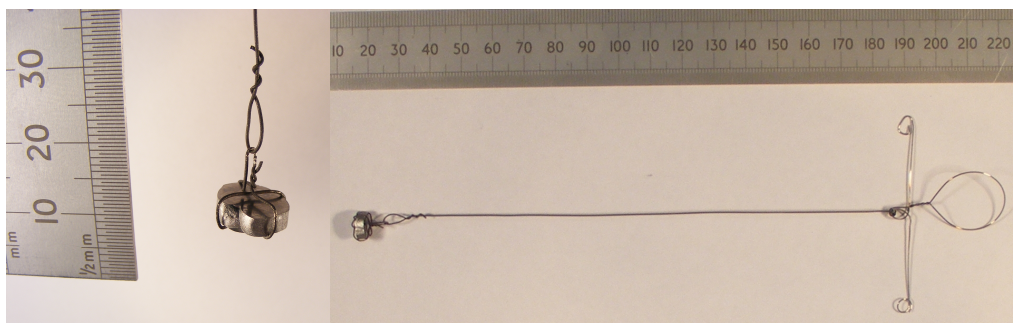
The nichrome wire cradle shown containing a specimen ready for heat treatment (left), and the complete handle assembly used for transferring specimens in and out of the various heat treatment environments (right)
